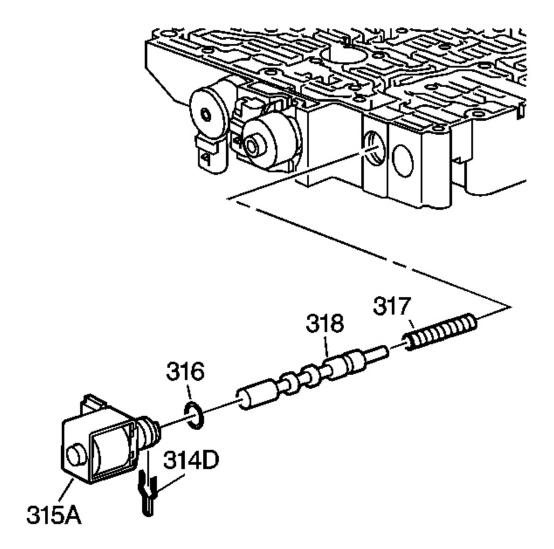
Identifying 1-2, 3-4 Shift Solenoid (SS) Valve Components Courtesy of GENERAL MOTORS CORP.
